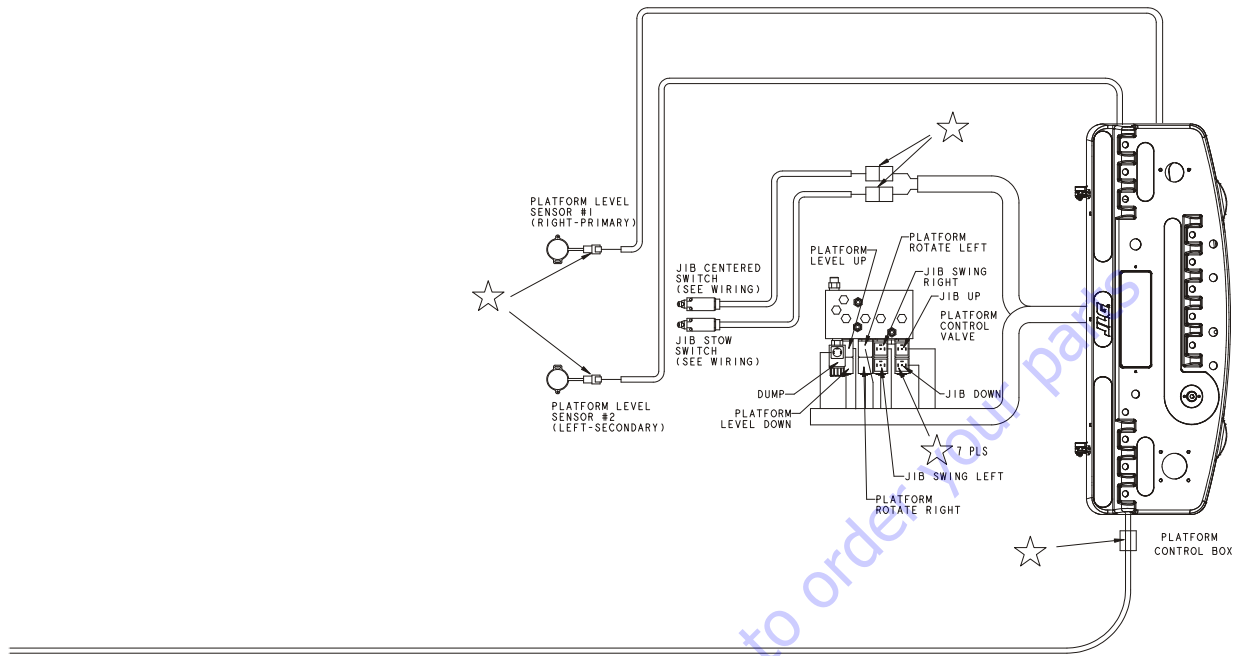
Wiring Harness Installation - Sheet 4 of 7
